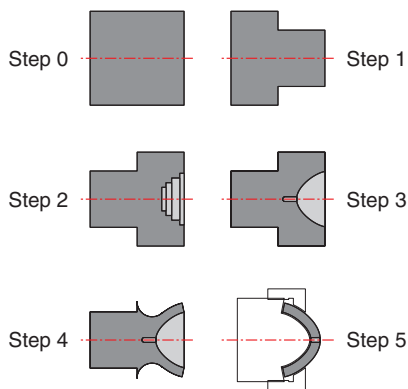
Initial shape of the ceramic piece (step 0) and successive machining steps (1-5). For step 5, the piece is held in a previously prepared metal holder. The holding lathe chuck is on the left side, but not shown.
